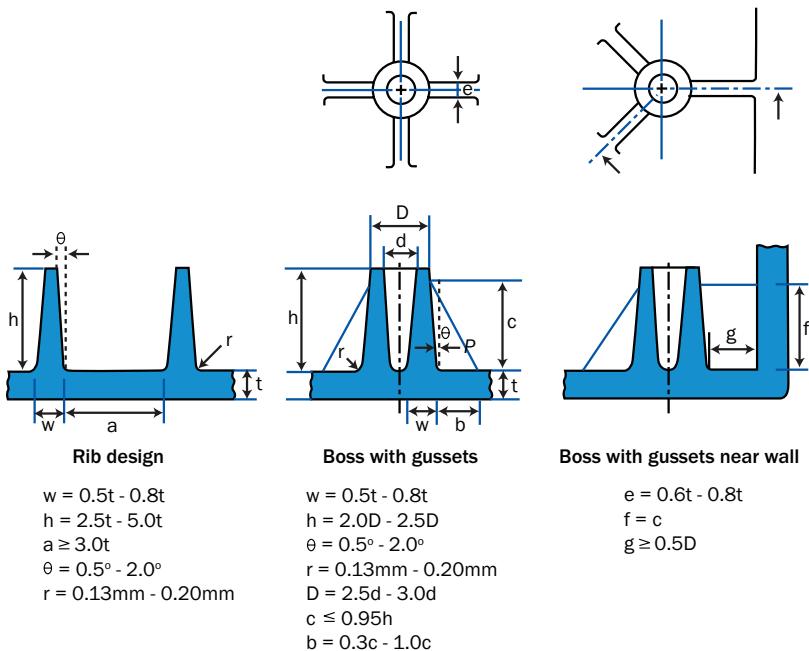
Recommended dimensions for ribs, bosses, and gussets
